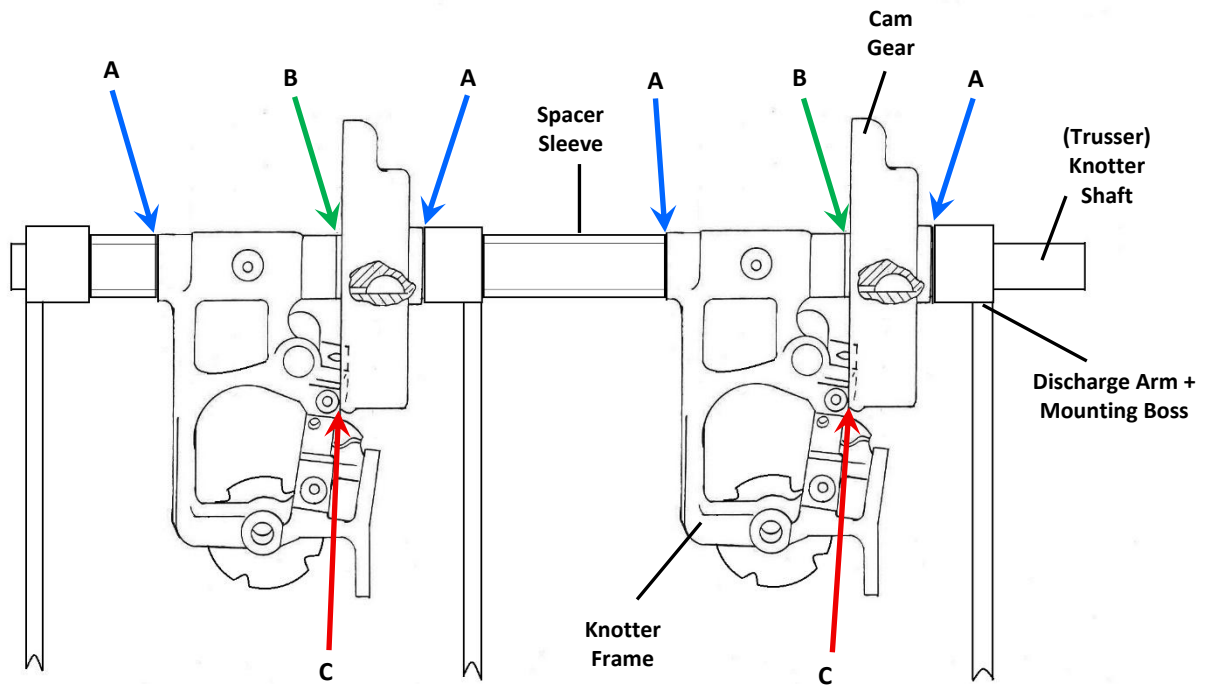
Knotter Unit – Cam Gear end float adjustment – Progressively add shims at Points ‘A’ and (very gradually) remove shims at Points ‘B’ until it is possible to rotate each knotter frame freely against the Cam Gear face with minimal clearance at Points ‘C’ (*less than 0.4 mm (0.015”)*)
